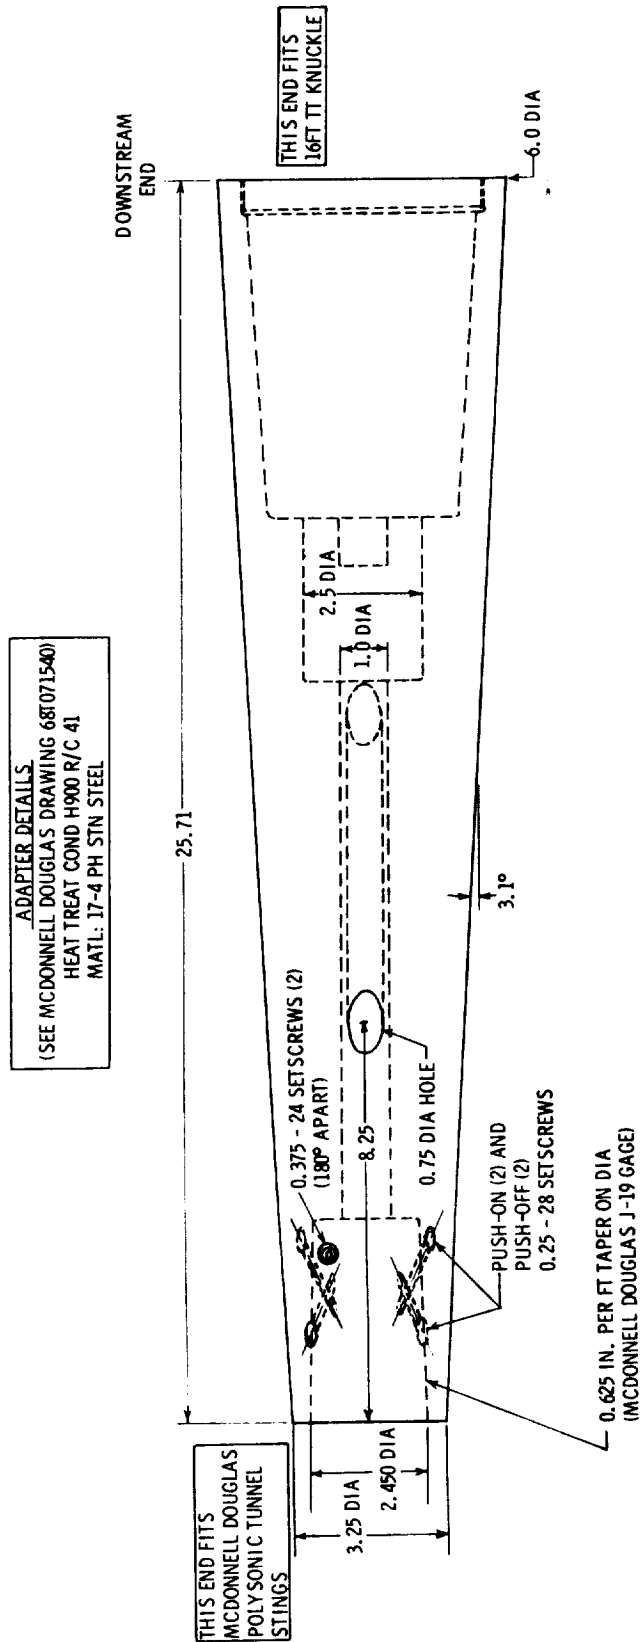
Sketch of adapter 68T071540. (All dimensions are in inches unless otherwise indicated.)
